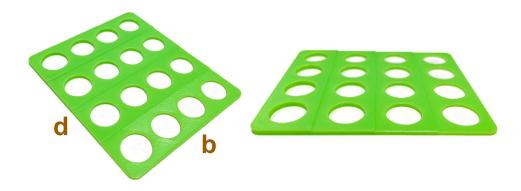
The figure shows the 3D printed plate with different hole configurations. It was used to test hole fitting for concept c4 and c13. The plate dimension is $92 \, \text{mm} \times 110 \, \text{mm}$ (b x d).
